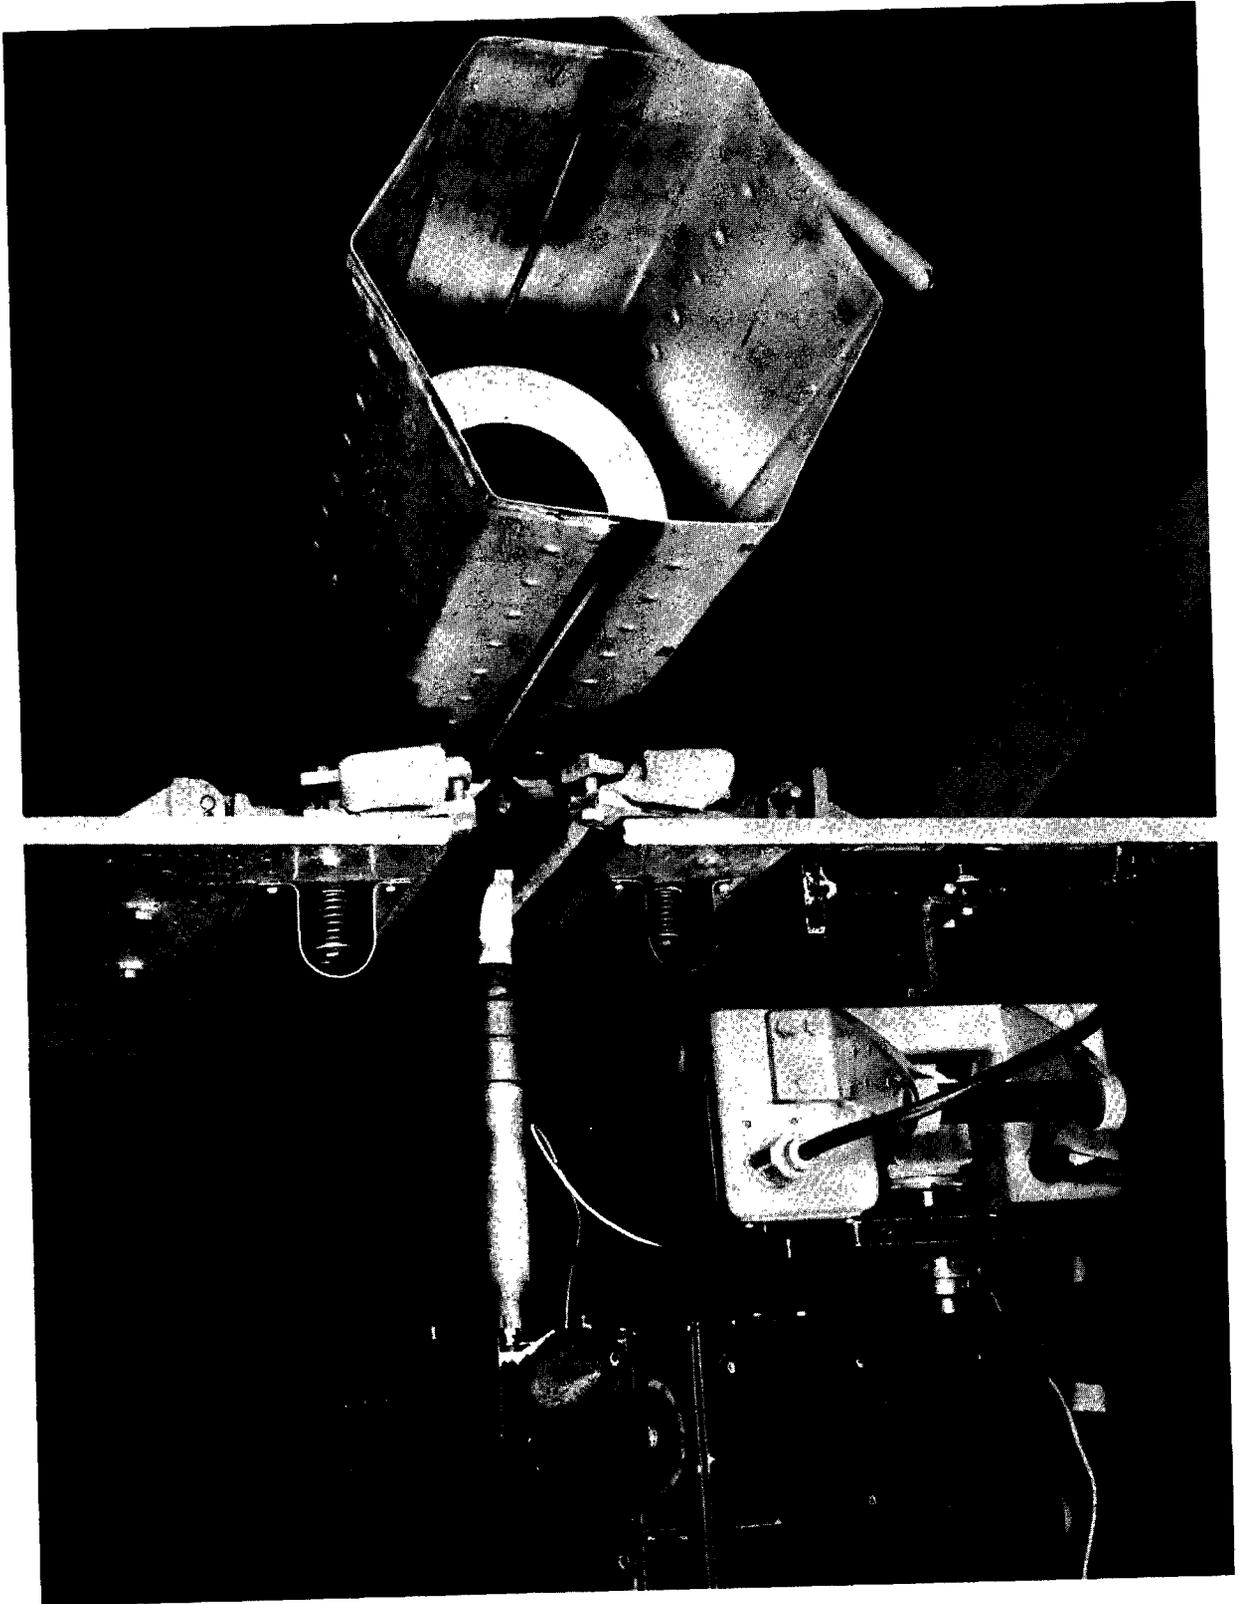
Welding of Panels into Hexagonal Tube
